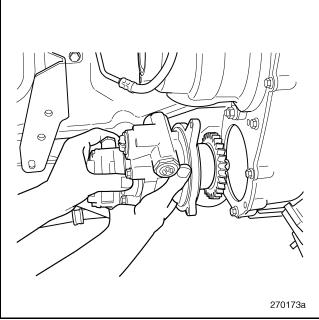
Tandem Pump (Fuel and Power Steering) Installation
